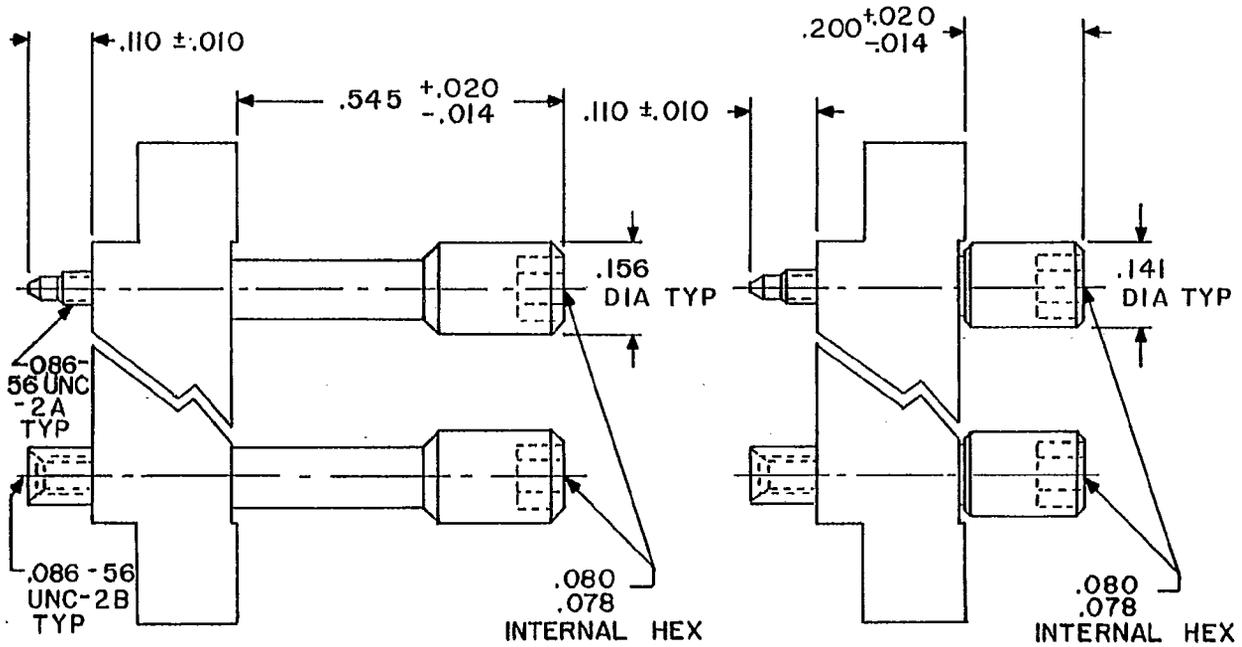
Connector, receptacle .075 (1.91 mm) spacing - Continued.
